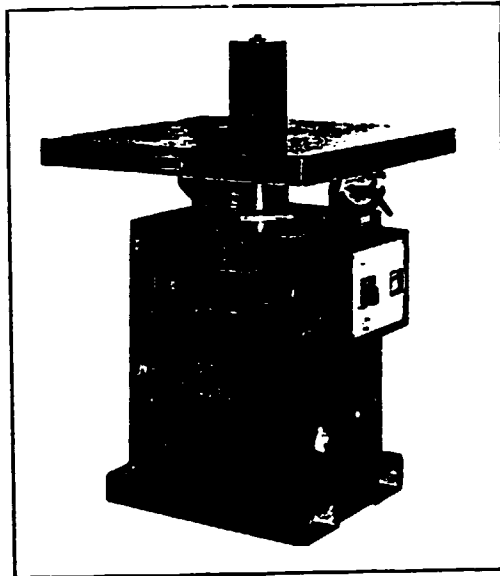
Vertical sponge sander: ideas for sanding the edges and bent surfaces of wooden furniture components.
